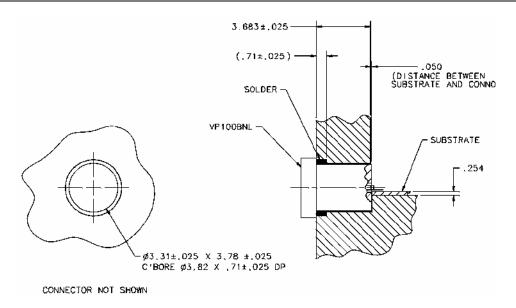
VP100CNL Mounting Hole Dimensions and Assembly Drawing for Thick-wall housing
